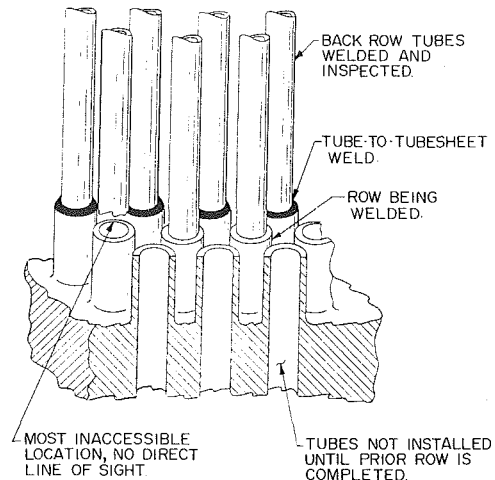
Tube-to-tubesheet welding sequence
